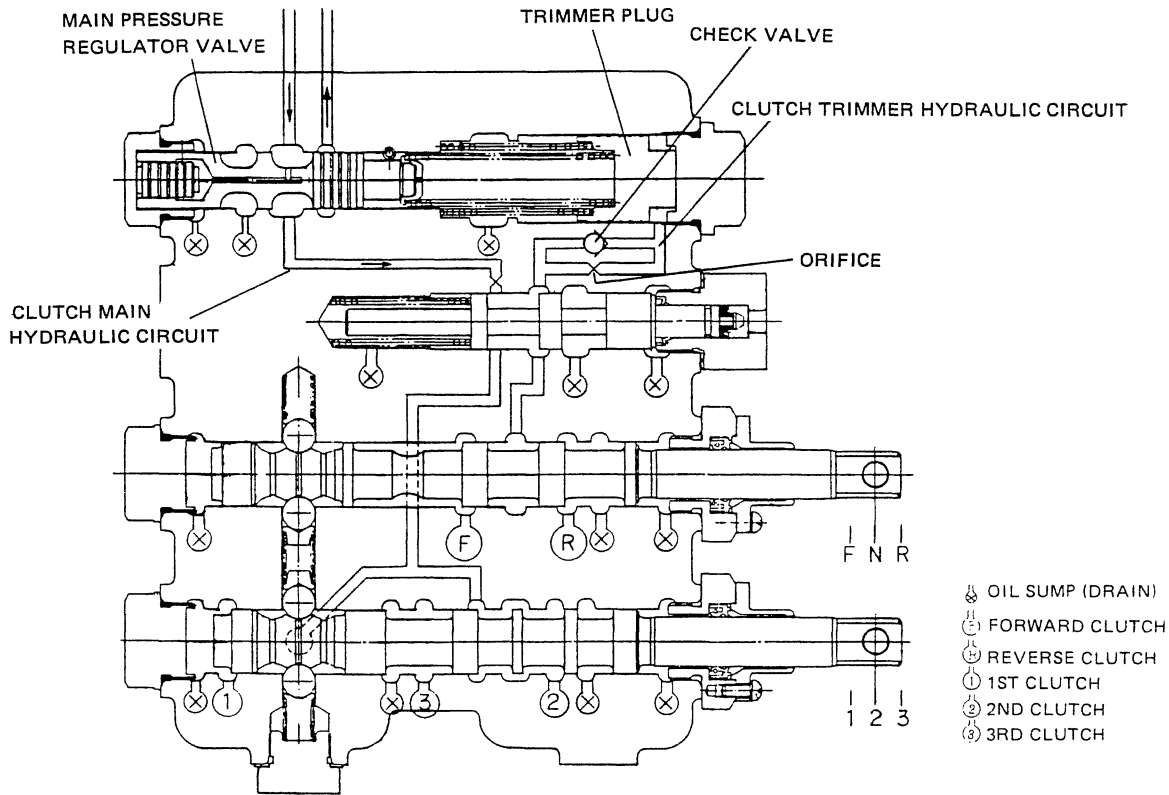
Main Pressure Regulator Valve Trimmer Circuit
